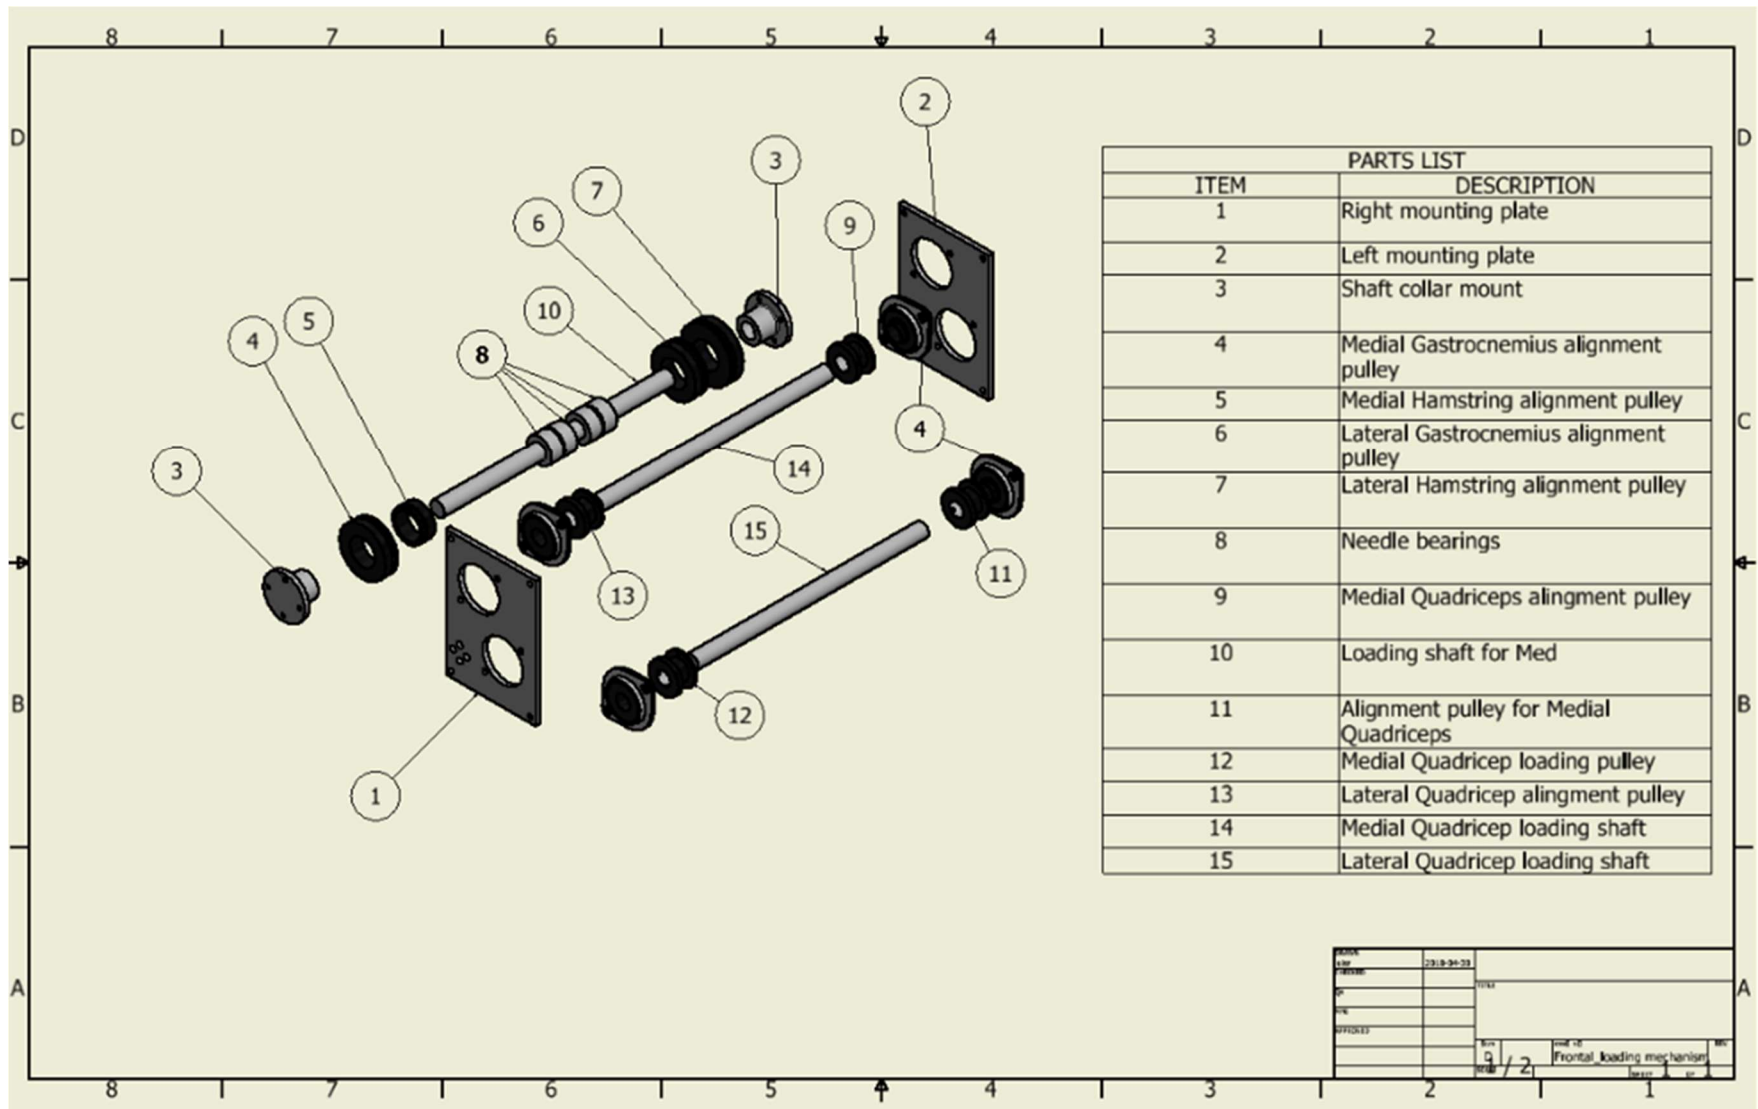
Exploited view of the loading shafts inside the loading chamber of the simulator.
